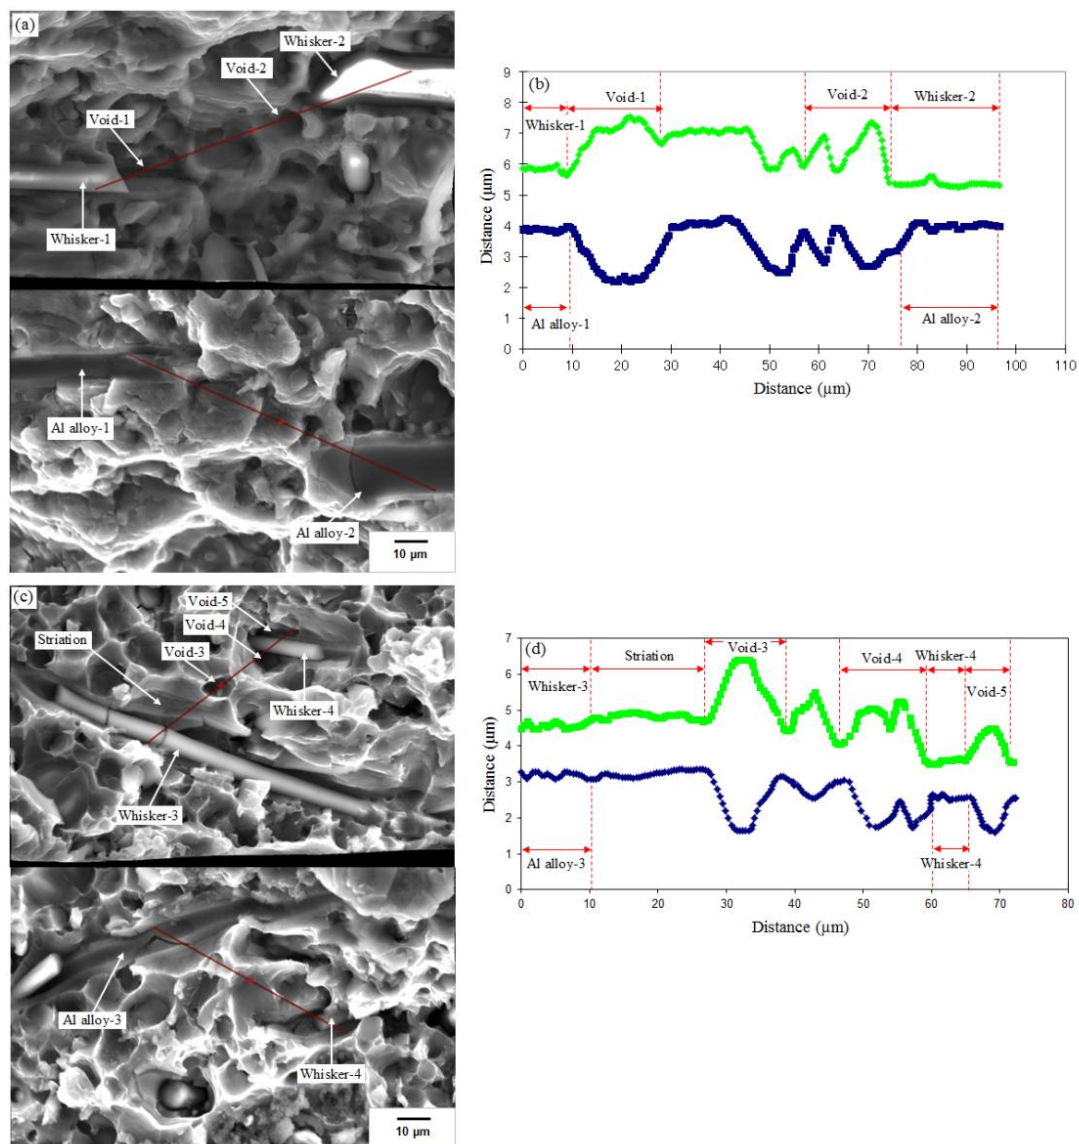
Crack propagation from one Al_2O_3 whisker to another in MMC with Al_2O_3 whisker: (a) Matching fracture surface at the near threshold region, (b) Crack surface profile at the near threshold region, (c) Matching fracture surface at the stable crack growth region, (d) Crack surface profile at the stable crack growth region.
